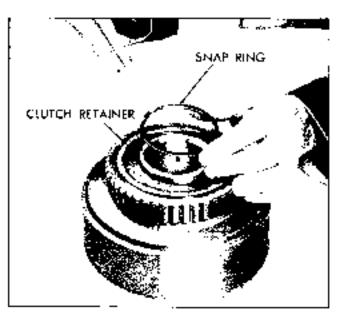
Removing Intermediate Clutch Re-piner Shap Ring
